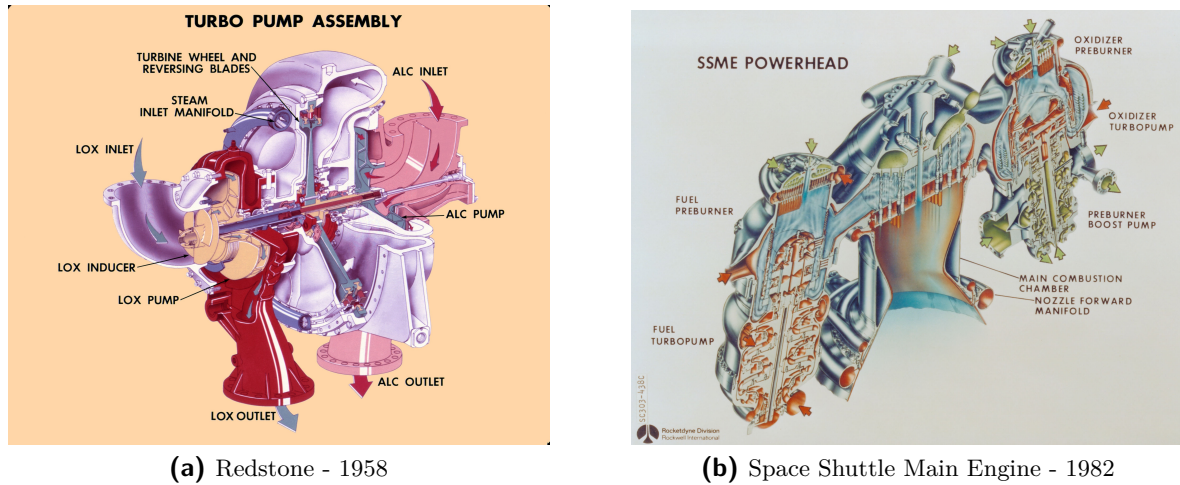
The turbopump assemblies of Redstone rocket [1958] and of the Space Shuttle Main Engine (SSME) [1982] are shown in this figure. We could observe the single shaft operation used in the older Redstone rocket and the separate assemblies for the later SSME. Figure courtesy - Rocketdyne
